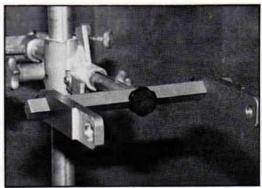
Modified alignment jig mounted in the Vertical Fabrication Machine.
